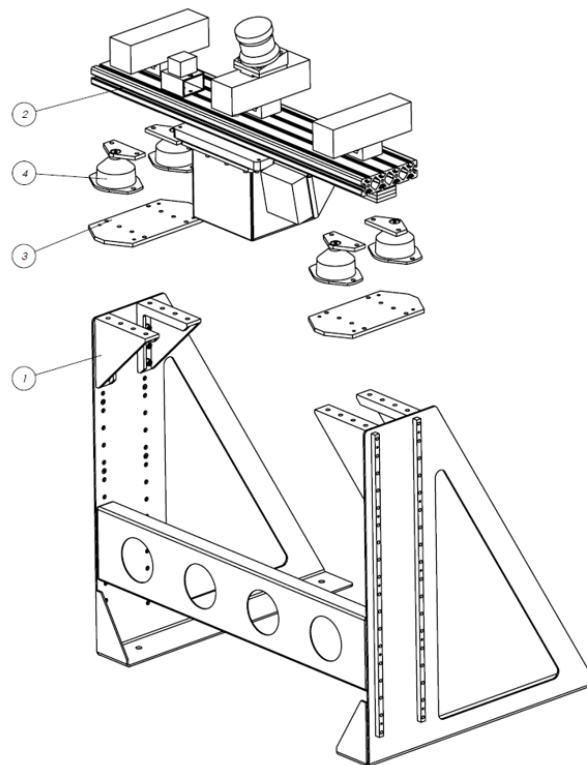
Exploded view of Tors sensor rig and platform with sensors
